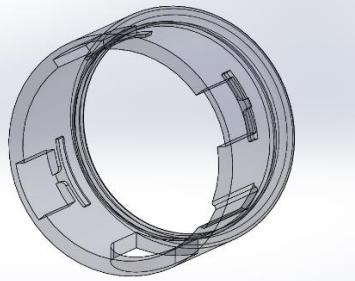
Structure v1.1 test print model showing PCB tab cut-outs and stops
